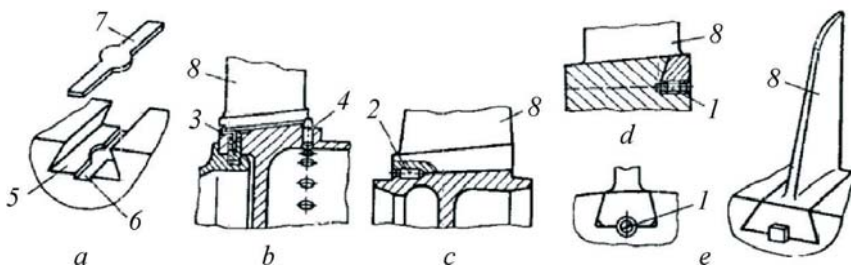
Fixation of the blades with dovetail-type fastening [15]:
